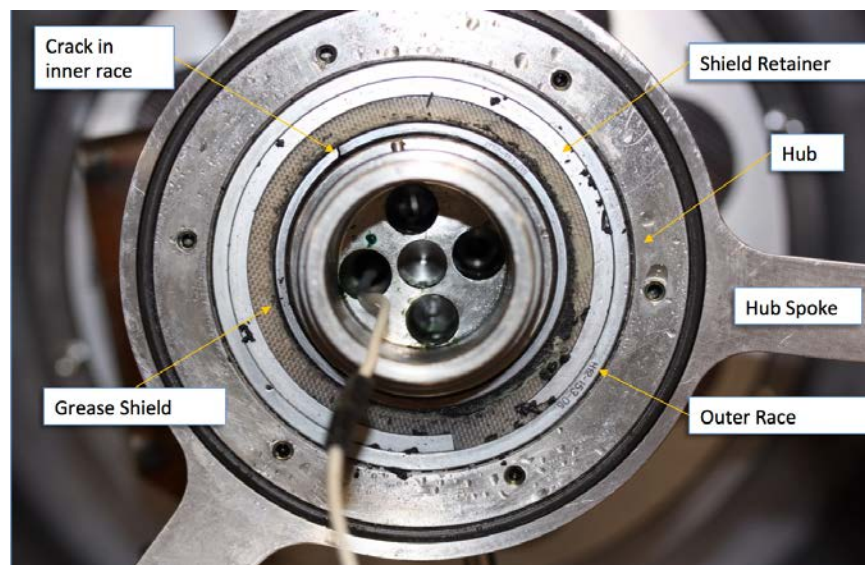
Hub-side view of failed ISS Distillation Assembly centrifuge bearing. Note cracked inner race and ejected wear debris
